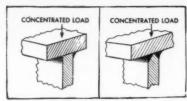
Joint between heavy flange and web, showing machined edge at left, and full weld at right.
